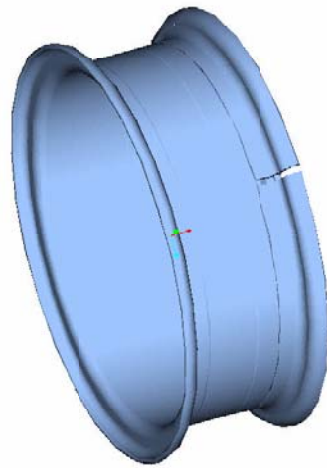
Tube-Type Demountable Rim Assembly (two-piece)
